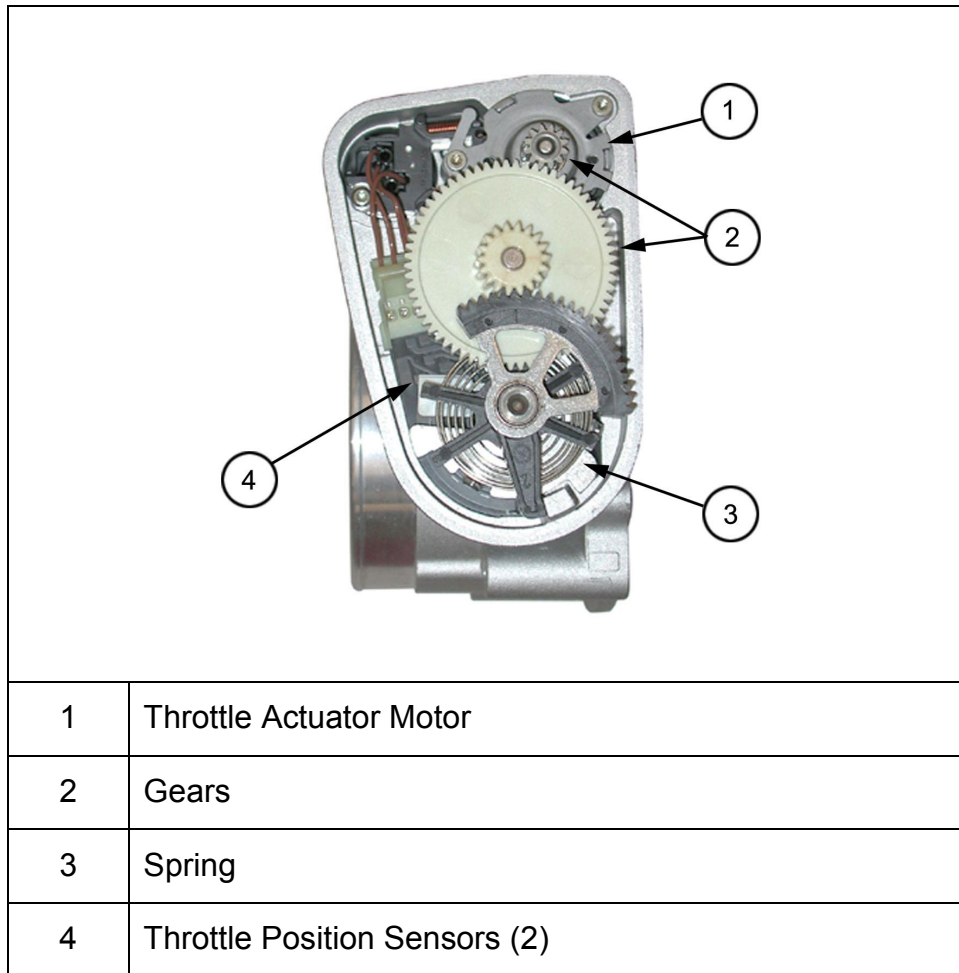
5.7L ETC Throttle Actuator Motor, TPS, Spring and Gears
